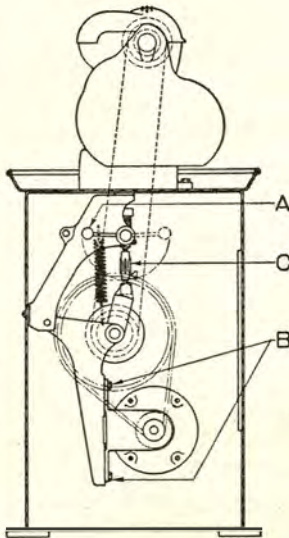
Underneath Motor Drive Arrangement for 9" and Light Ten South Bend Lathes
